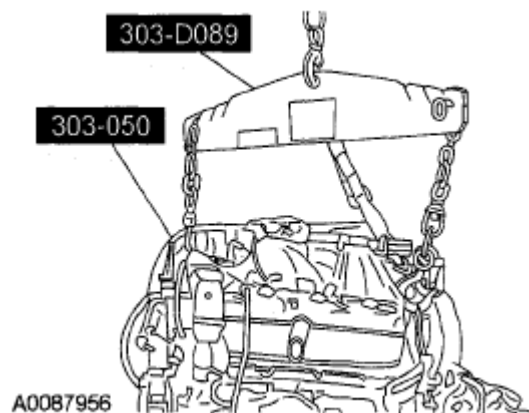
Identifying Spreader Bar And Engine Lifting Brackets
